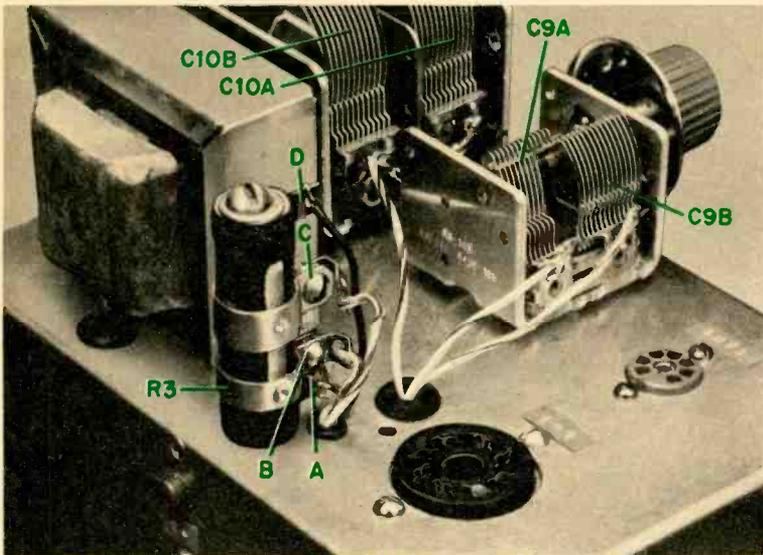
Closeup of top of chassis shows mounting of B+ voltage-divider power resistor R3. Mount R3 with a ¼-20 x 2½-in. screw. Slider contact "C" is home brew since only one slider is supplied. Make a cover of perforated aluminum to fit over R3 so you don't touch it. If you did you'd get a nasty shock and burn. Both sections of C10 (top) are connected in parallel. C9A is the smaller section of C9.
